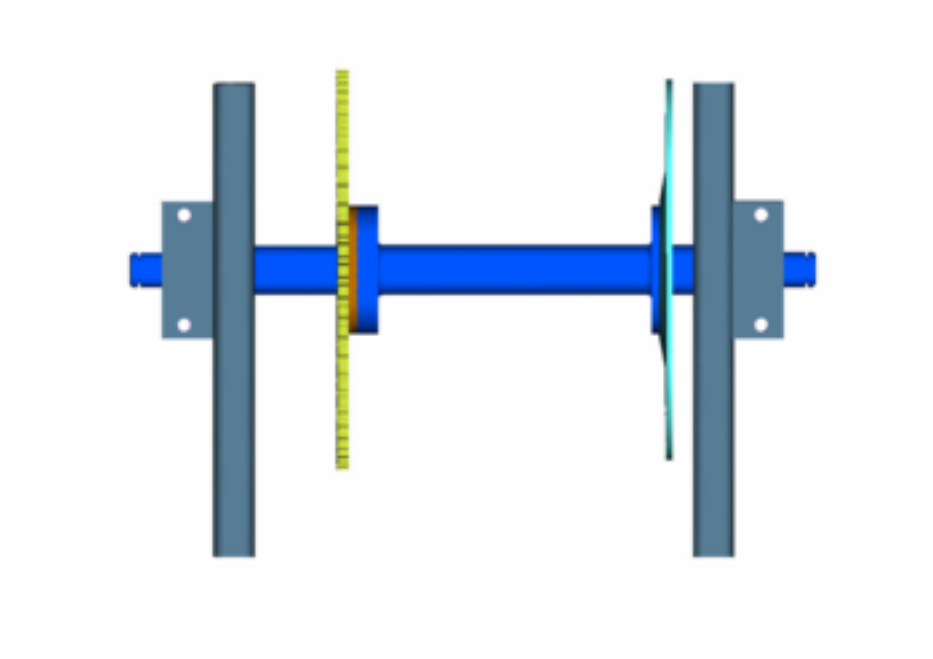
Top view showing the current mounting position of the centre shaft assembly in the SAE car.
